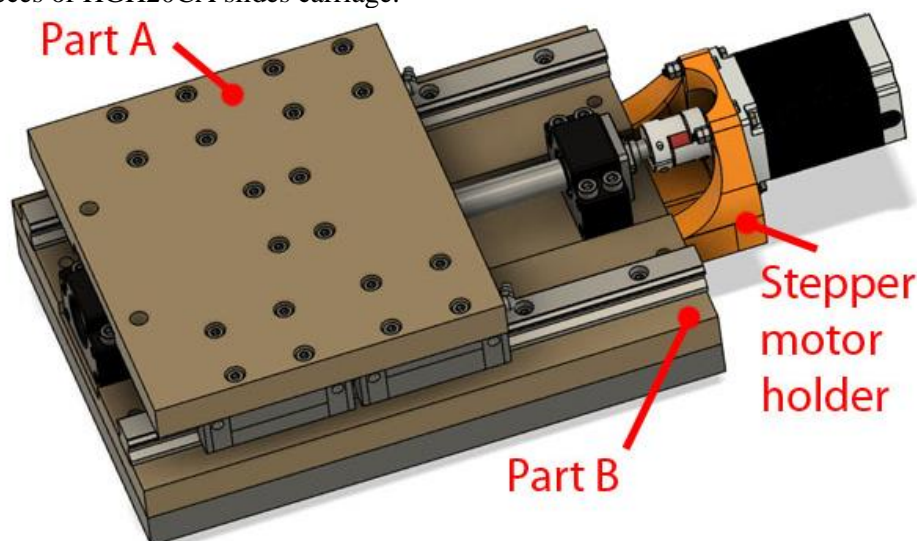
1 The complete 3D design of the Z-axis of the CNC milling machine
